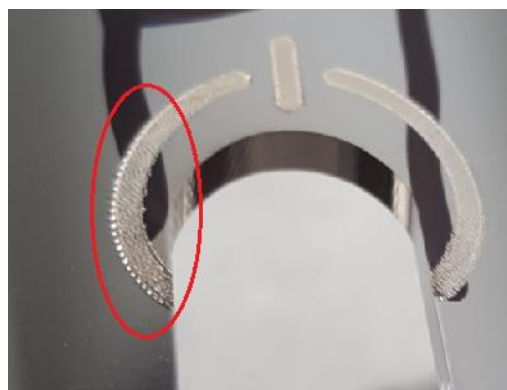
Laser engraving rough surface scrap on FOT-C
